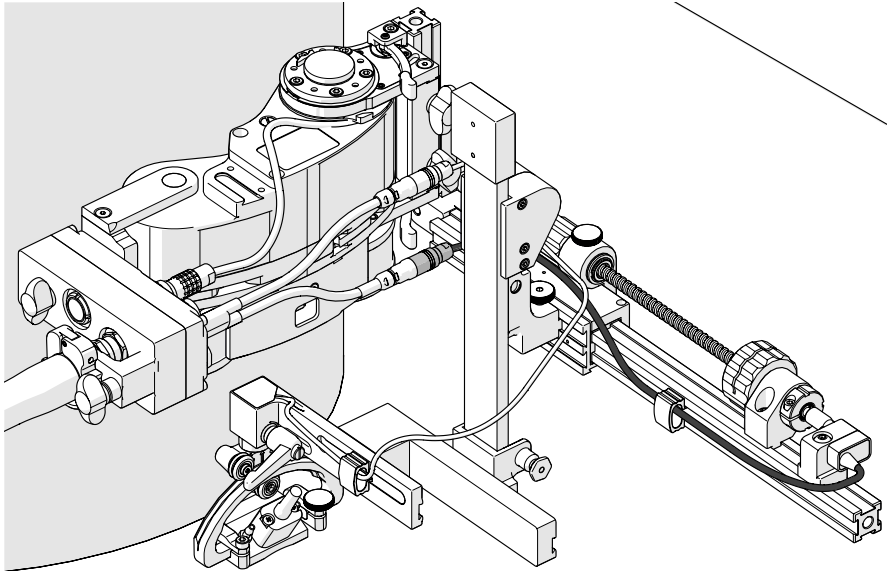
Route encoder cable to the 3-axis encoder cable
